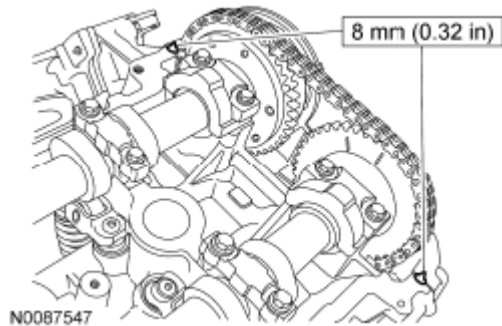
Applying Dot Of Silicone Gasket Sealant To Front Cover-To-Cylinder Head Joints
